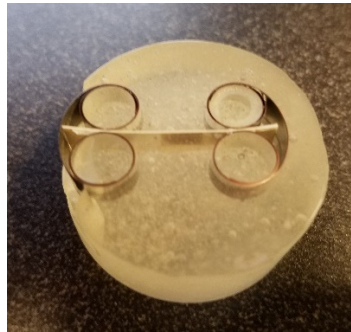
Cross section of eight-layer thick Suntronic™ ink
